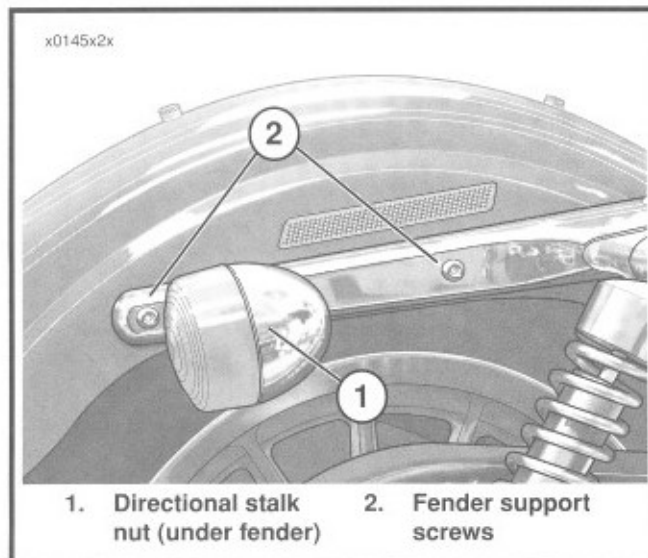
Rear Fender, Strut Cover and Directional Lamp Assembly
